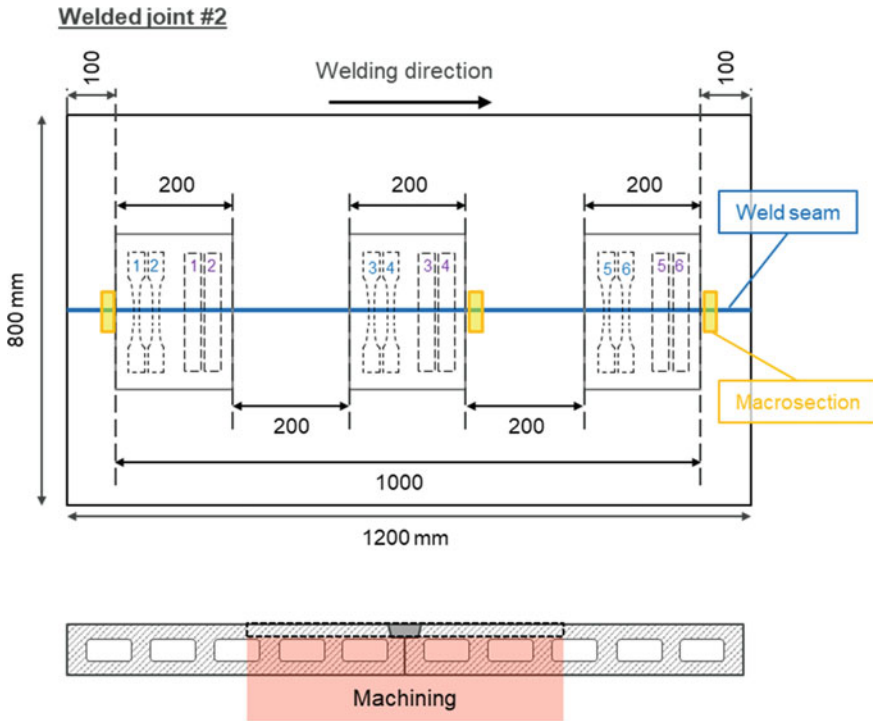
Position of the tensile test specimens, bending test specimens, and metallographic cross-sections
